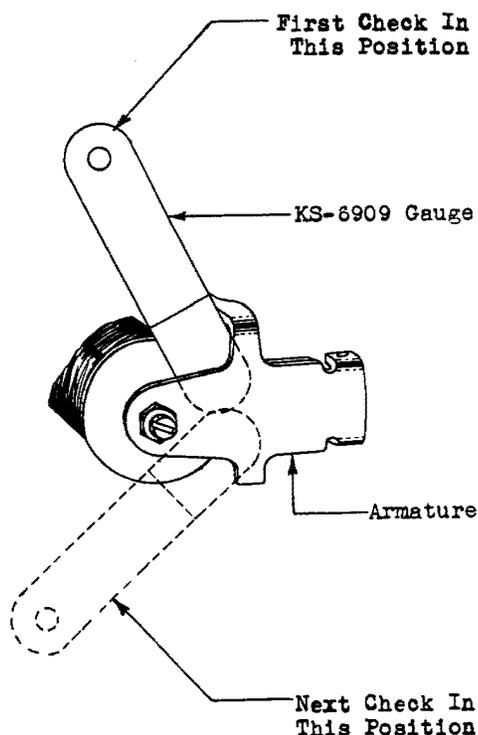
Fig. M - Checking Maximum Test Heelpiece Airgap on 247- and 248-Type Relays
